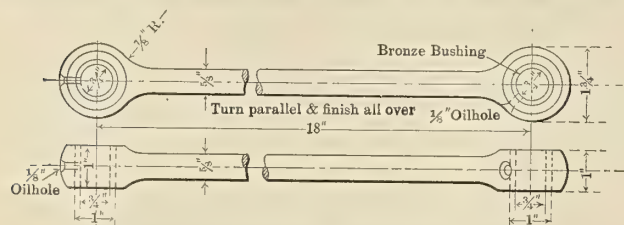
CROSS-HEAD LINK. MAKE ONE OF MILD STEEL.
